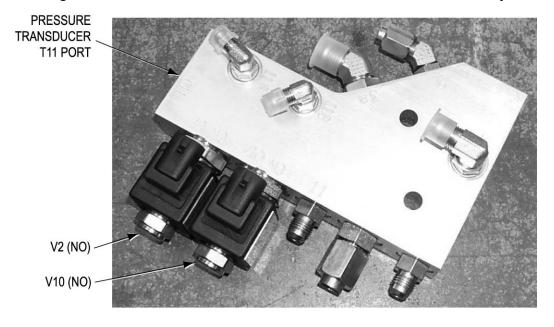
Electrical Connections on Forward Right Manifold Assembly
